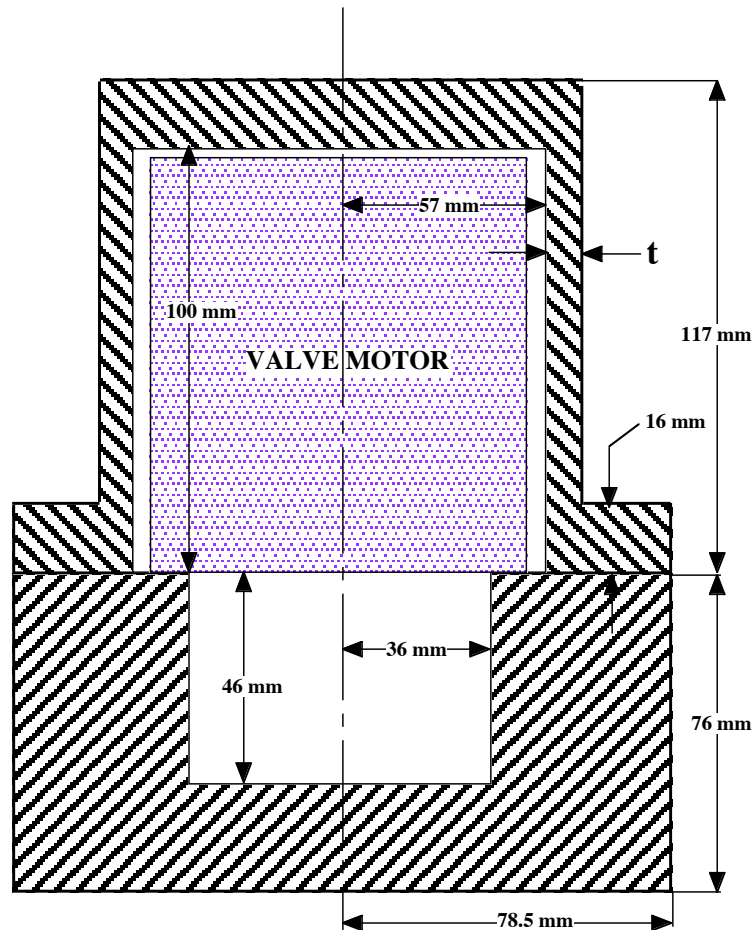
The Magnetic Model for the PT415 Cooler Valve Motor Shield (The shield replaces the aluminum case around the motor ($t = 8.2$ mm) or the shield around the motor itself is 33 mm thick.)
